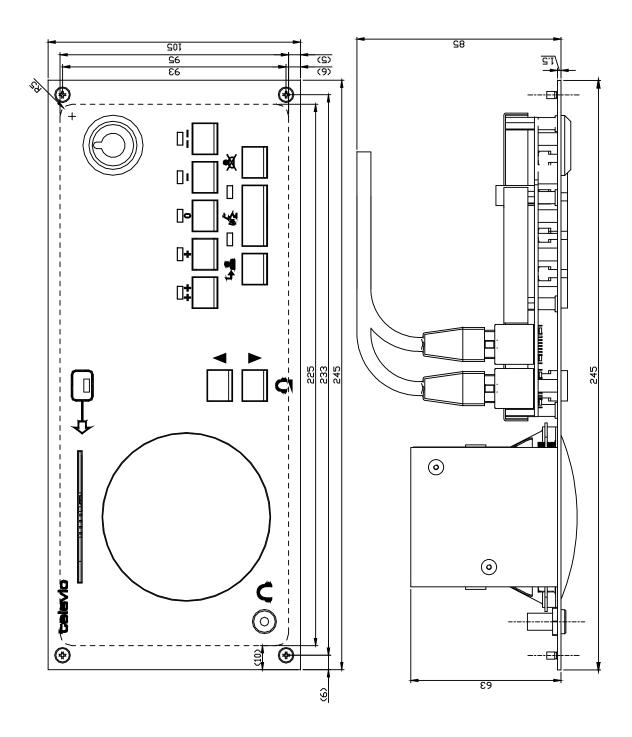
Dimensions and cut-out FD/MV5CS and FC/MV5CS
